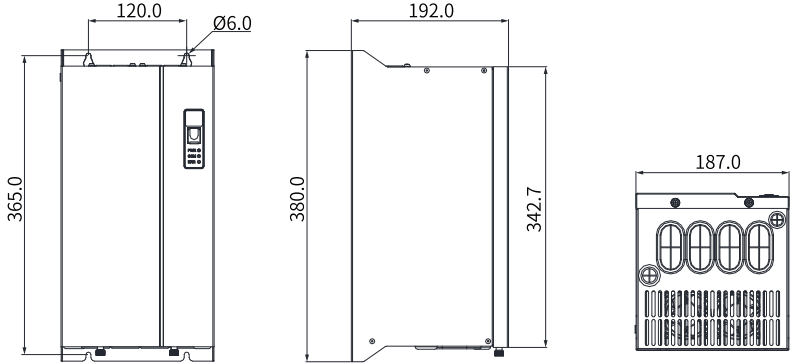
Outline dimensions of MDBUN-200-7T braking unit (unit: mm)
